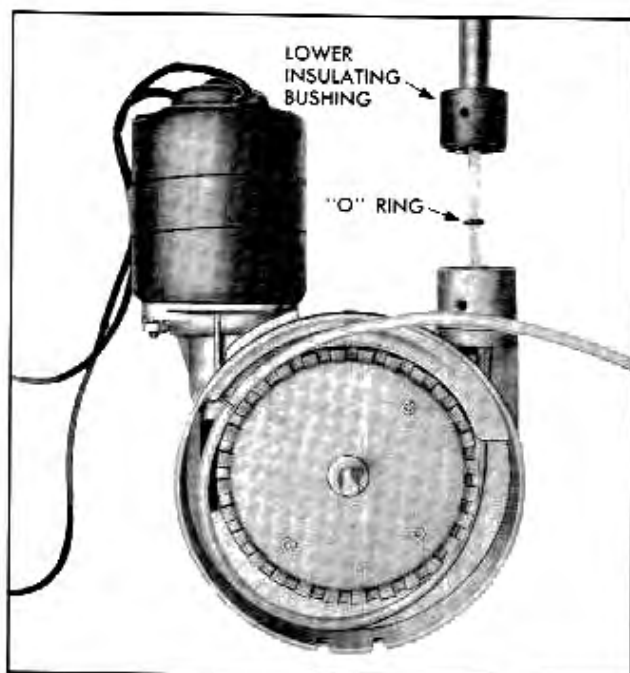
Installing Nylon Cable and Mast Assembly
